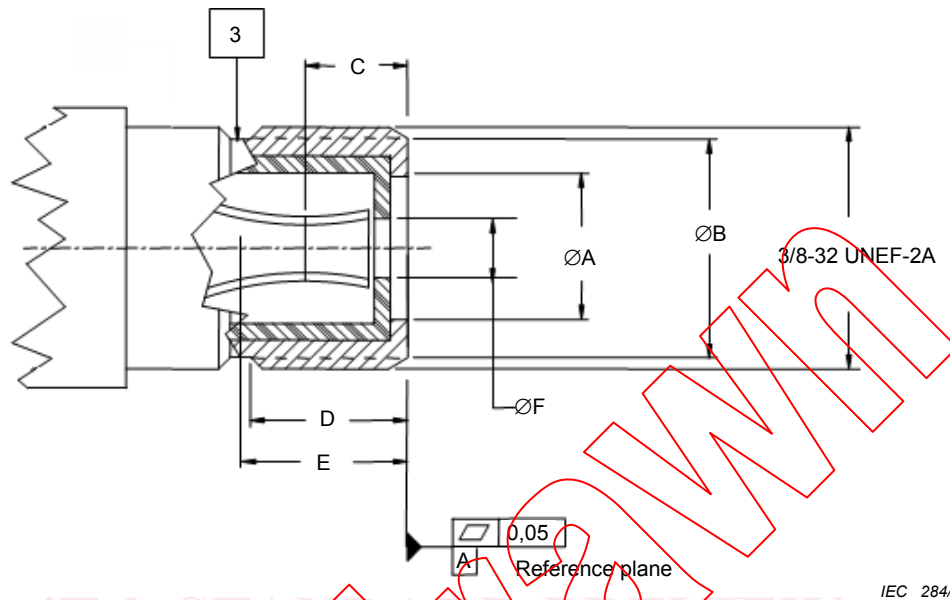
Connector "F" type female socket (indoor) (for dimensions, see Table 1)
